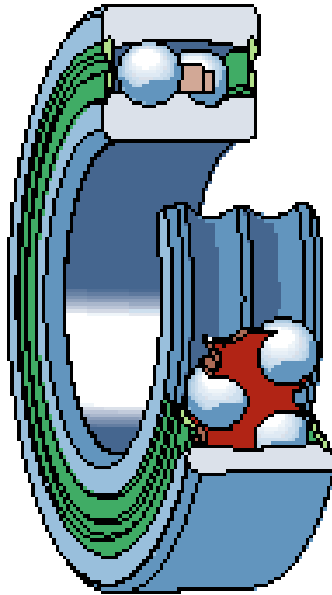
Sealed Self-Aligning Ball Bearing (SKF; Gothenburg, Sweden)
